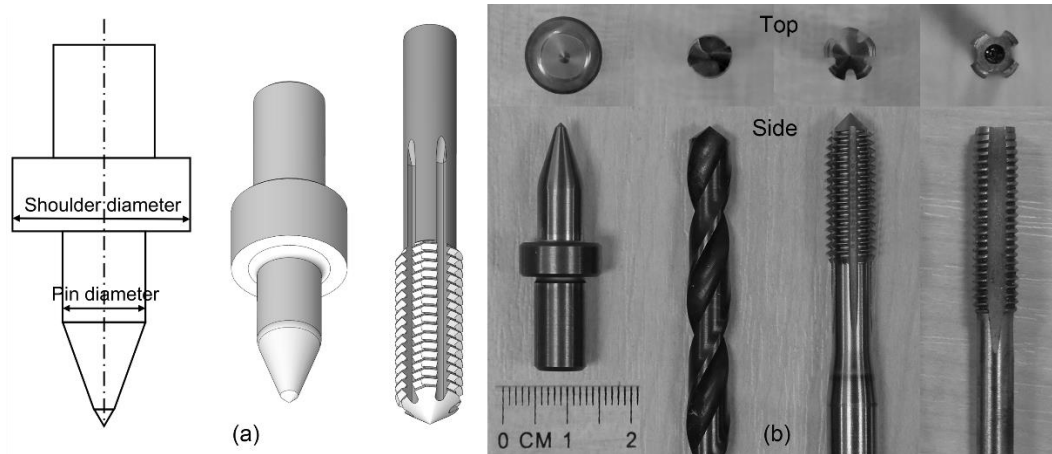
(a) Schematic of the friction drilling and thread forming tools. (b) Plan view (top row) and side view (bottom row) of the tools used for (from left to right) friction drilling, twist drilling, thread forming and thread cutting, respectively.
